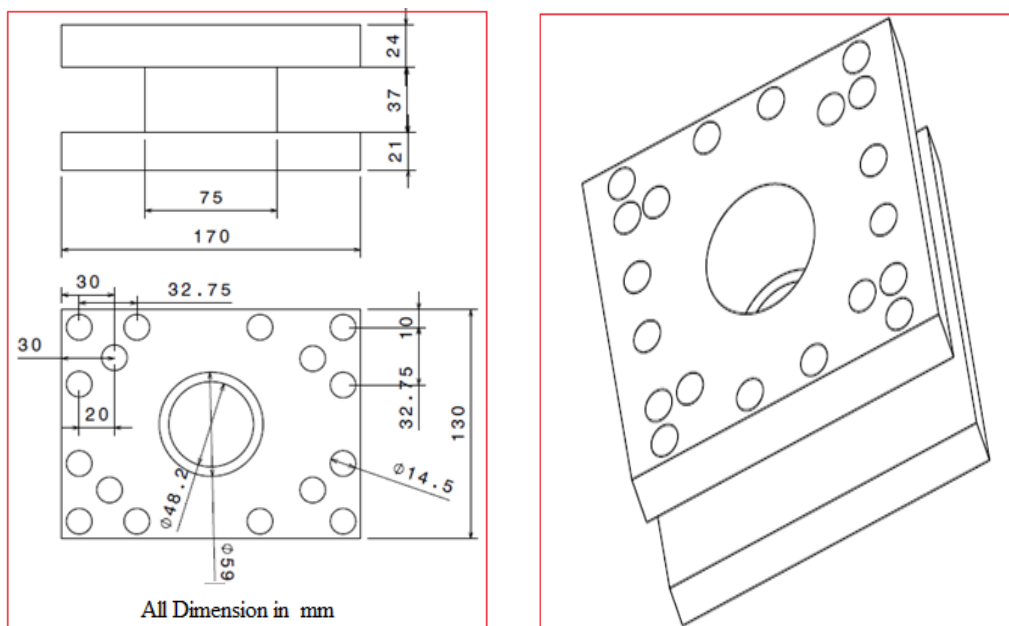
(a) Detailed schematic of the Tool Fixture
